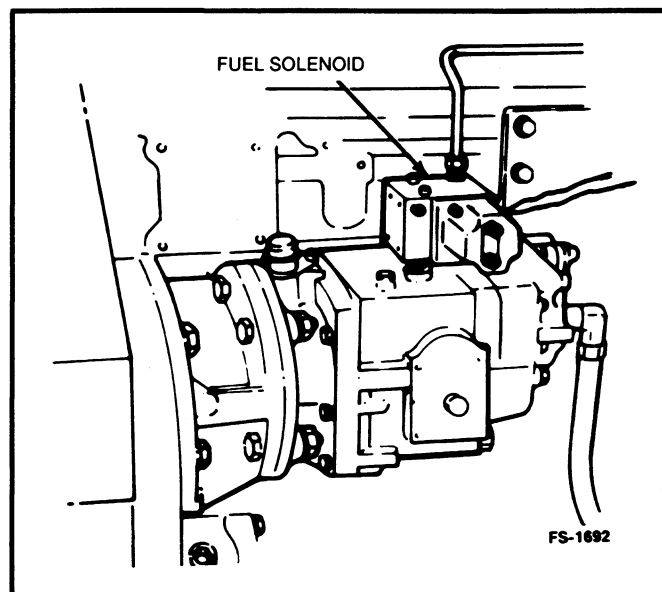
FUEL SOLENOID VALVE LOCATION
